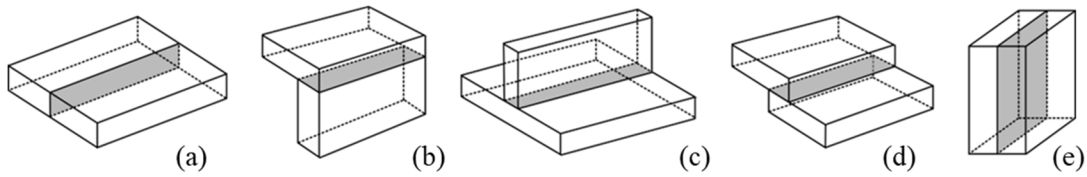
Basic weld joint configurations including (a) butt (b) corner (c) tee (d) lap and (e) edge
